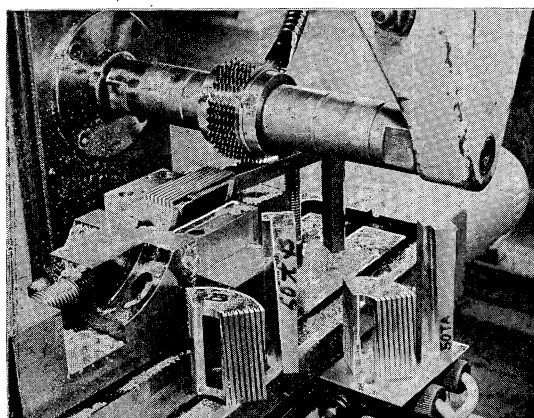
Machining a quadrant unit of cut coil. Grooves are cut in the side surfaces and then in the end surfaces.
